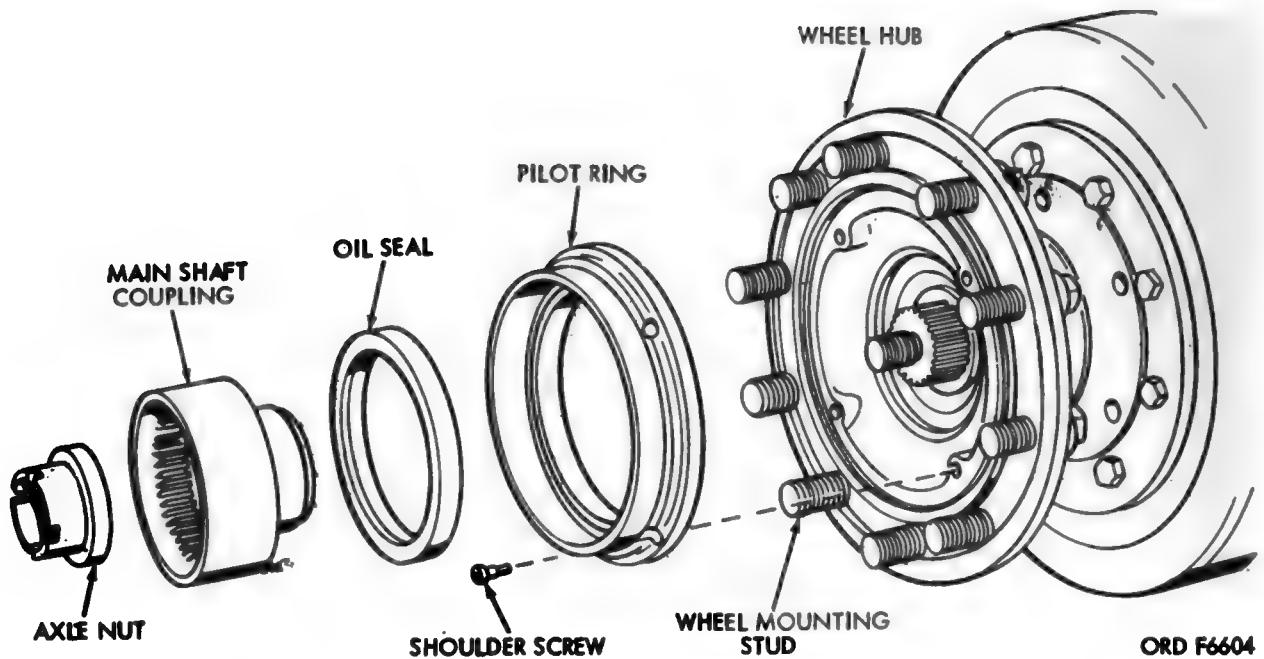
Removal or installation of wheel drive unit attaching parts (M123A1 only).
